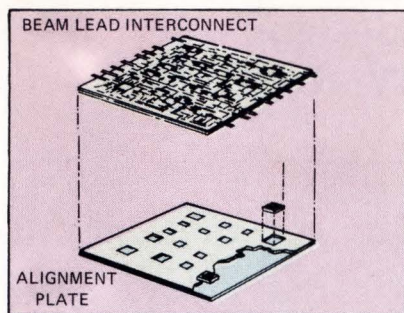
Beam-Lead Interconnect Package called a "BLIP" consists of a multilayered interconnect plate and an alignment plate. Automated assembly is the key.
